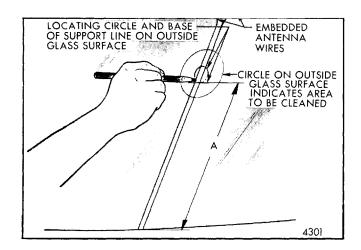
Locating Bonded Rearview Mirror Support on Glass
